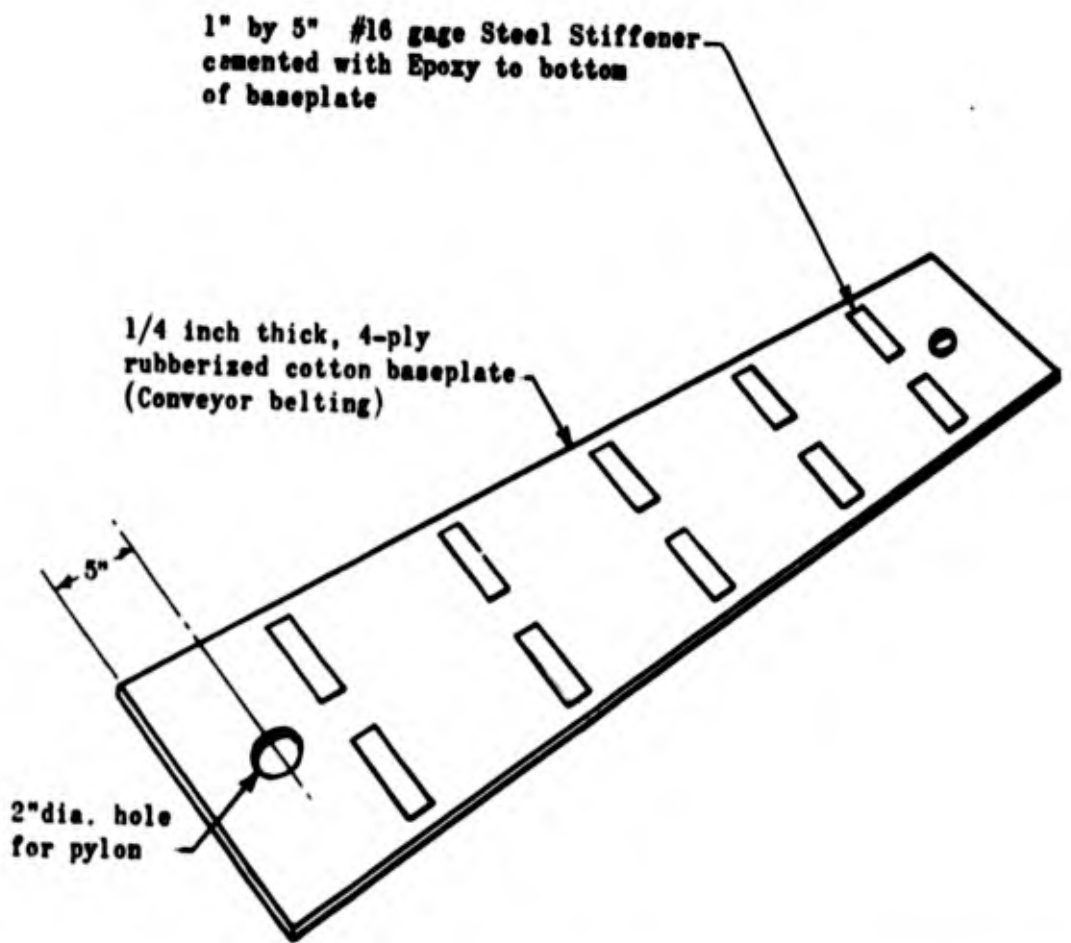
FLUSH MOUNTING BASE INSTALLATION
